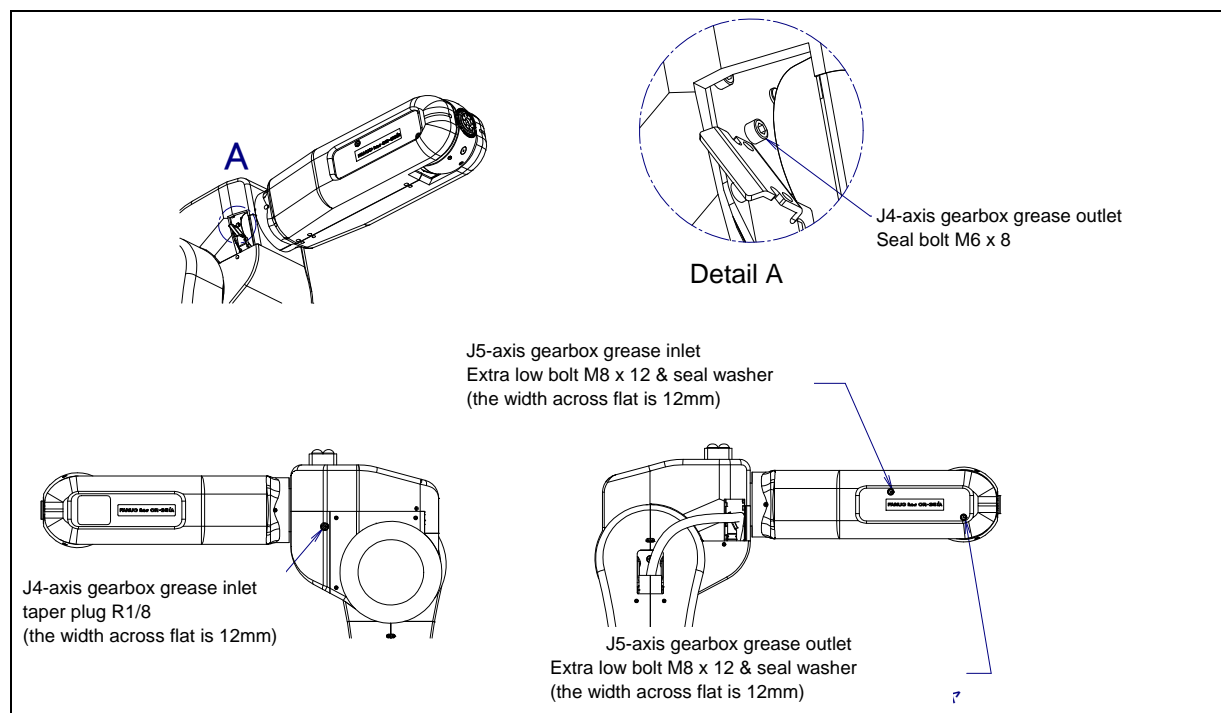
Greasing point of J4,J5-axis gearbox
